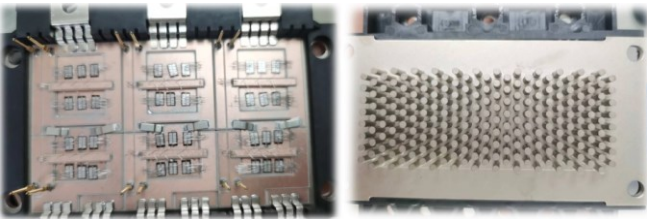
Manufactured power module with regular cylindrical PinFin.
